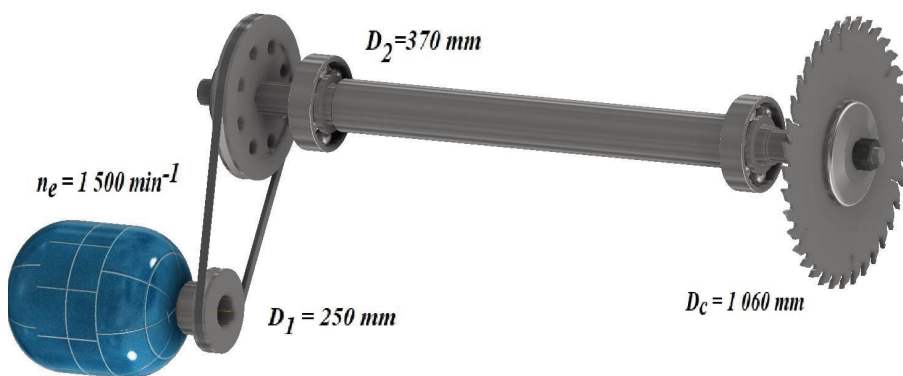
Kinematic diagram of the cutting mechanism of the studied machine
